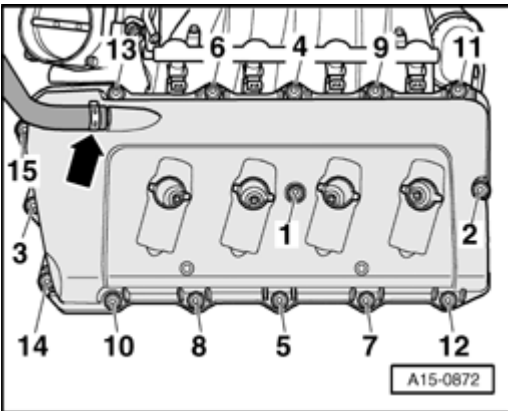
Disconnecting Hose Of Crankshaft Housing Ventilation & Removing Right Cylinder Head Cover Screws In Sequence
